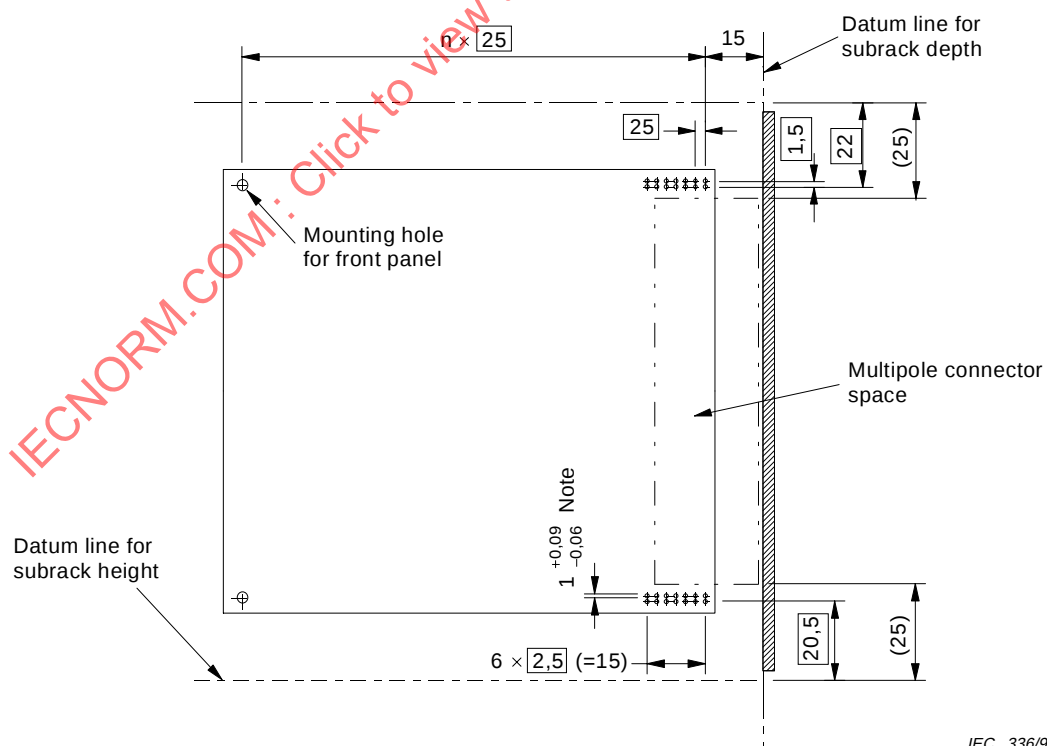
Example of hole pattern on printed board in the 25 mm equipment practice (for information only)
